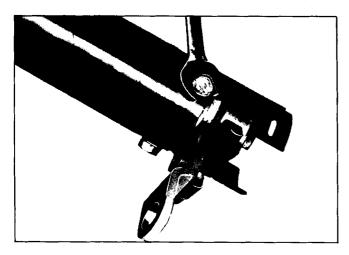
Removing Lower Shift Tube Support Screws - Manual Transmission
